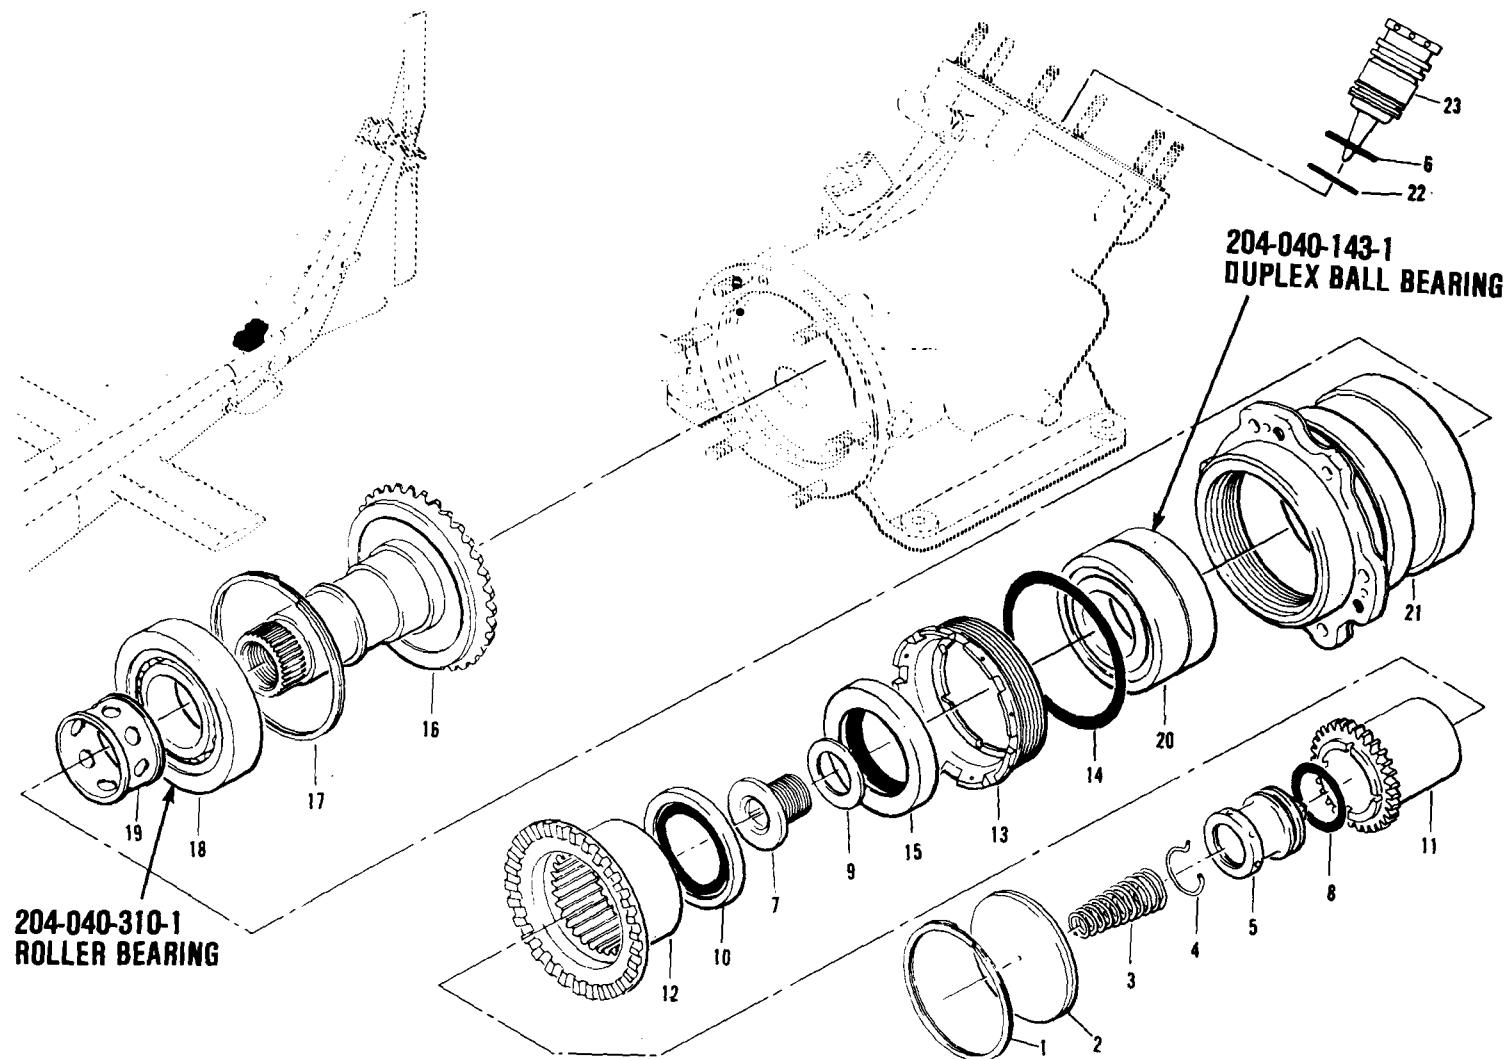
Quill Assembly, 42-Degree Gearbox, UH-1H
